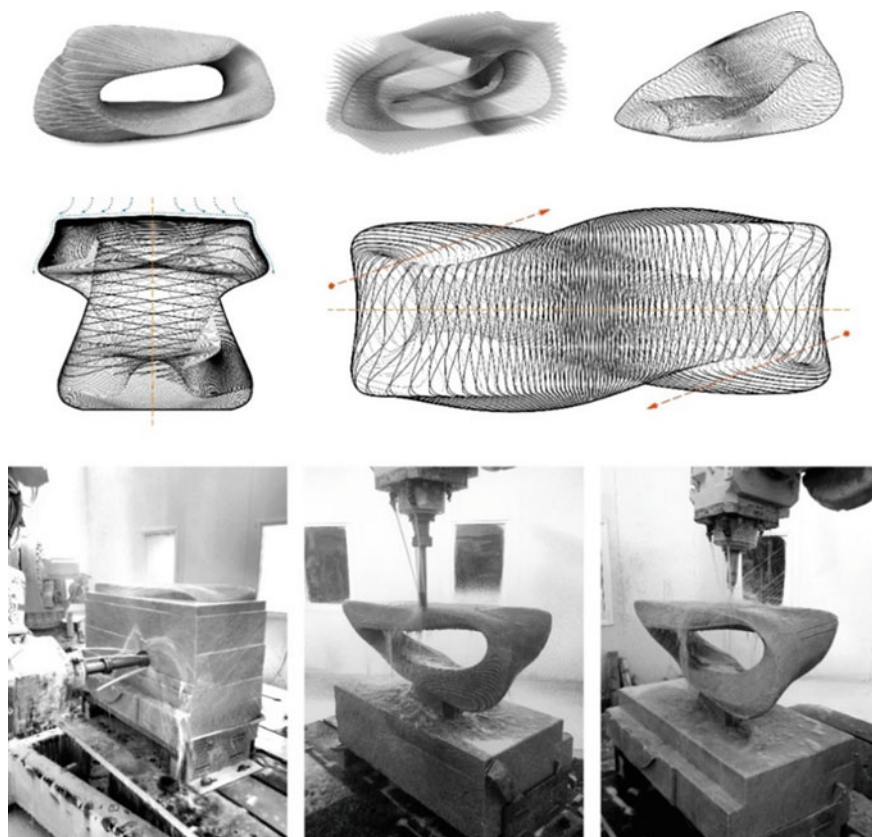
Case study 4 Top- 3D model showing the development of toolpaths for engraving, Middle-Plan and section views, Bottom-Fabrication using 7 axis milling
